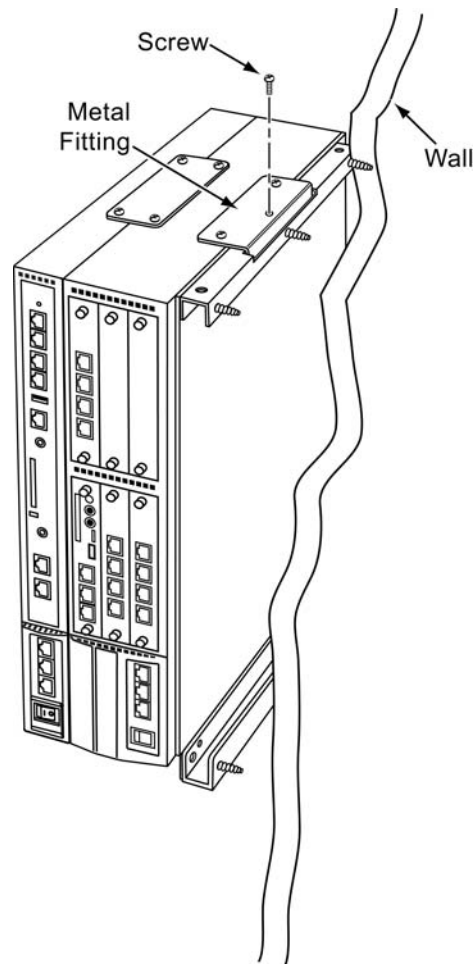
Secure Metal Fitting to Upper Wall Mount Bracket with a Screw
